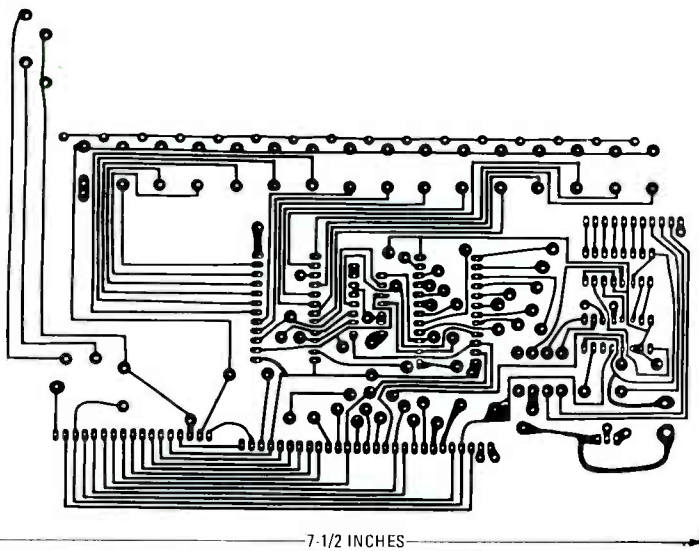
THE FOIL PATTERN for Board 2. The foil side of that double-sided board is shown here half-size.
